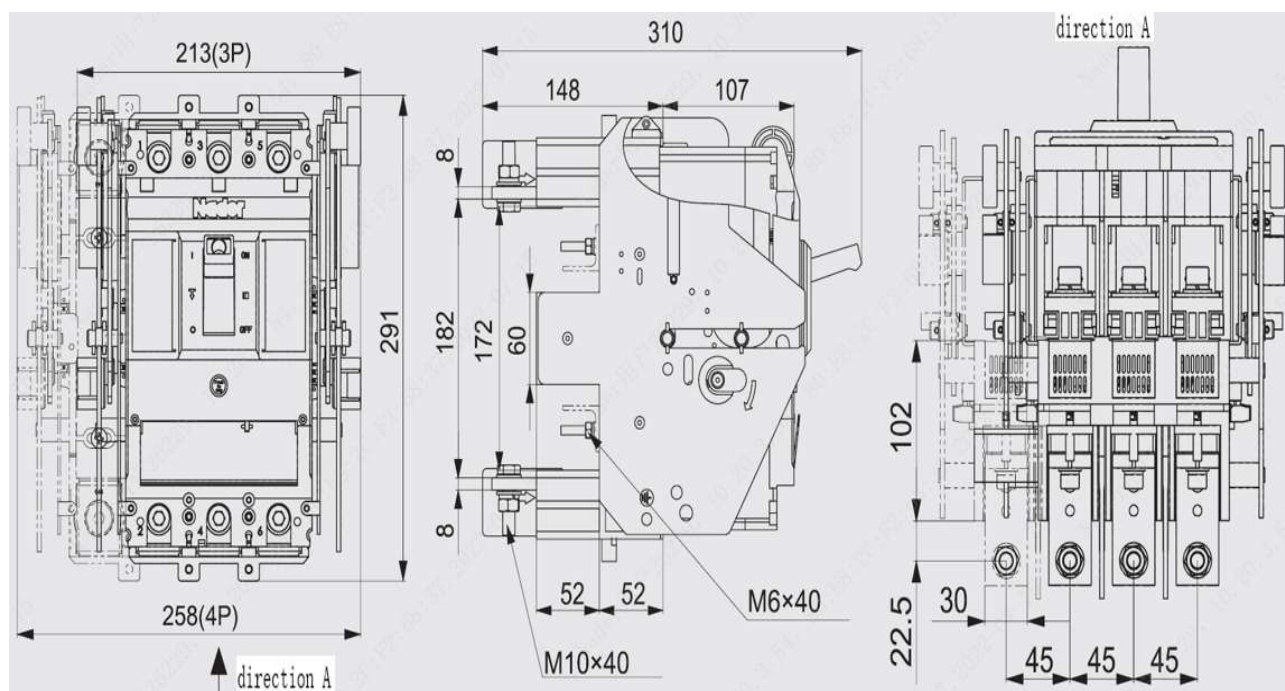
3P/4P Outline dimensions of withdrawable board rear wiring products
